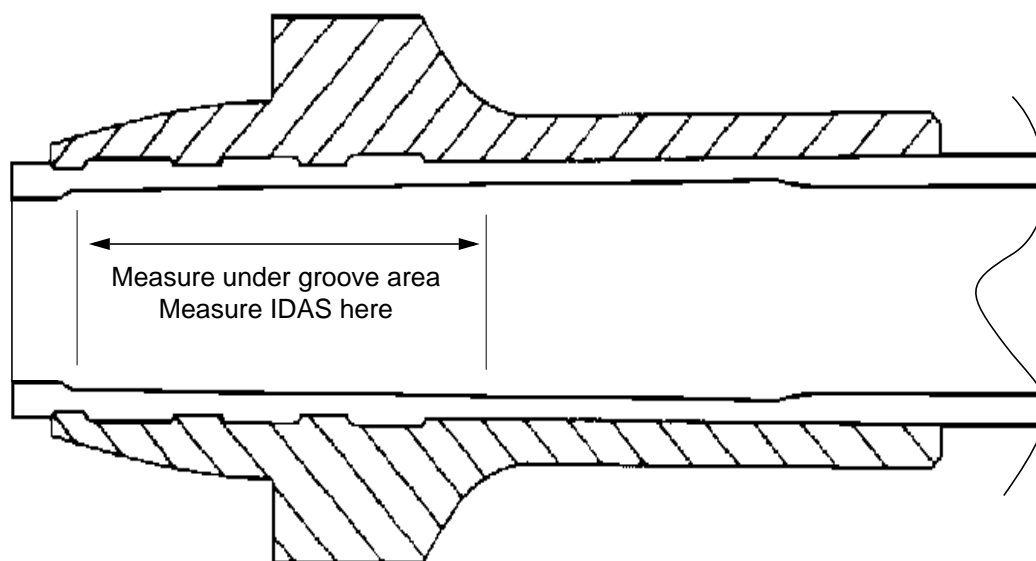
Location of Micrometer for Inspection of Swaged Tubes
